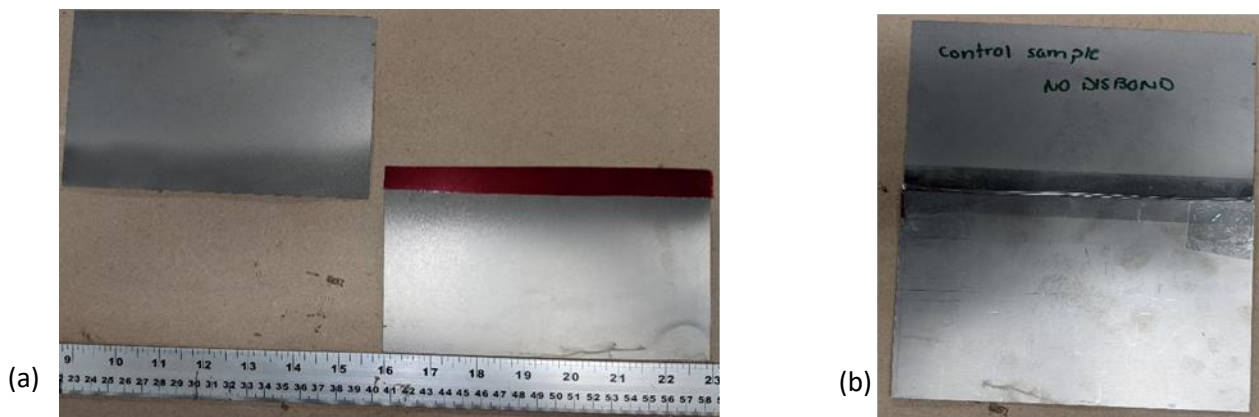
Assembly of test coupon (a) showing the adhesive line and (b) panel fully assembled.
